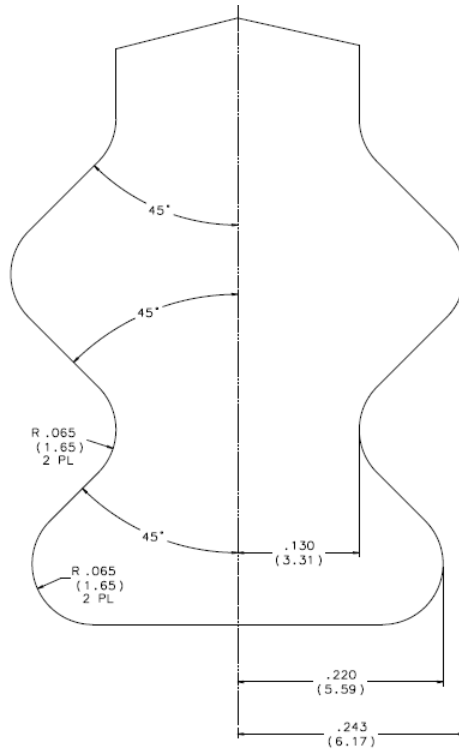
Test Case Geometry Definition: View of Blade Looking Radially Inward Showing Broach Angle and Blade Thickness in Inches and (Millimeters)
